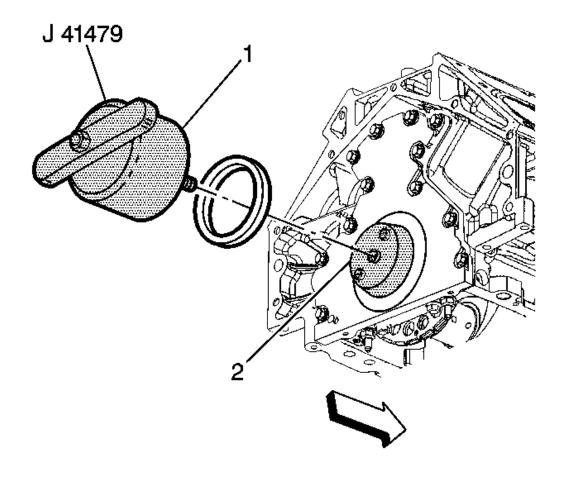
Installing Crankshaft Rear Oil Seal Using J 41479 Courtesy of GENERAL MOTORS CORP.
